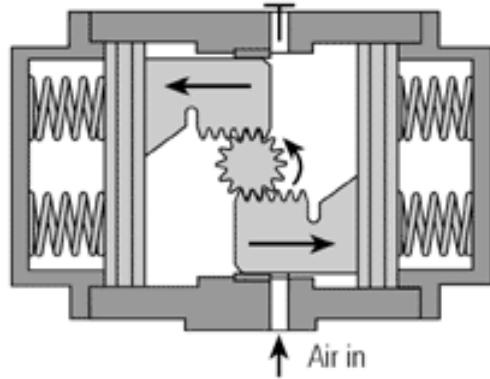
Spring Return Rotary Pneumatic Actuator. [20]
